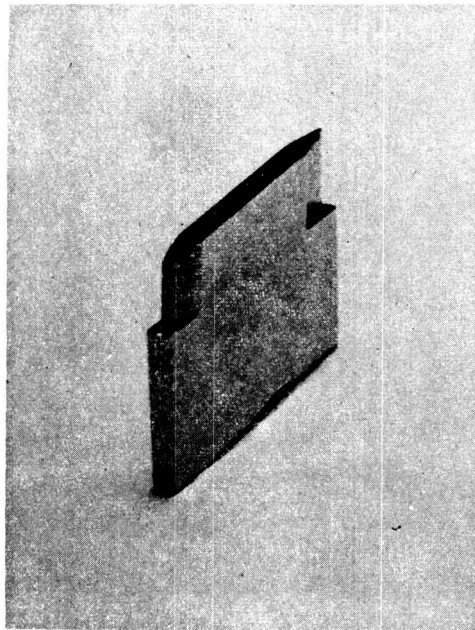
Macrograph of test specimen. The upper shadowed surface is the polished surface.
